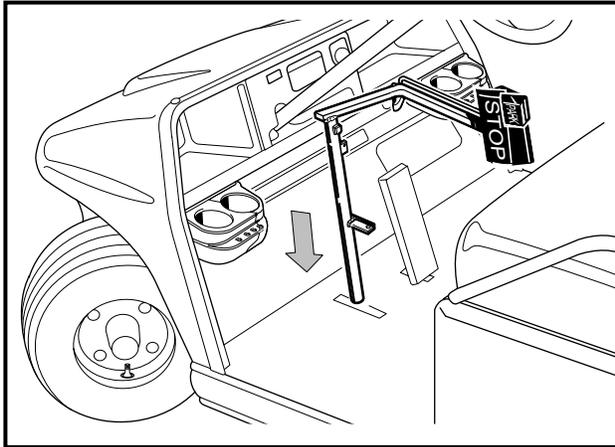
Brake Pedal Weldment Through Floor
